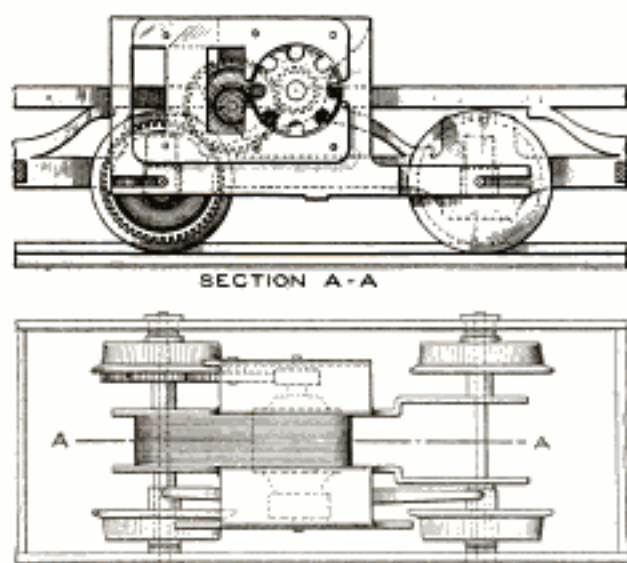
Installation of the Motor, Showing Gears and Switch Contact Spring
